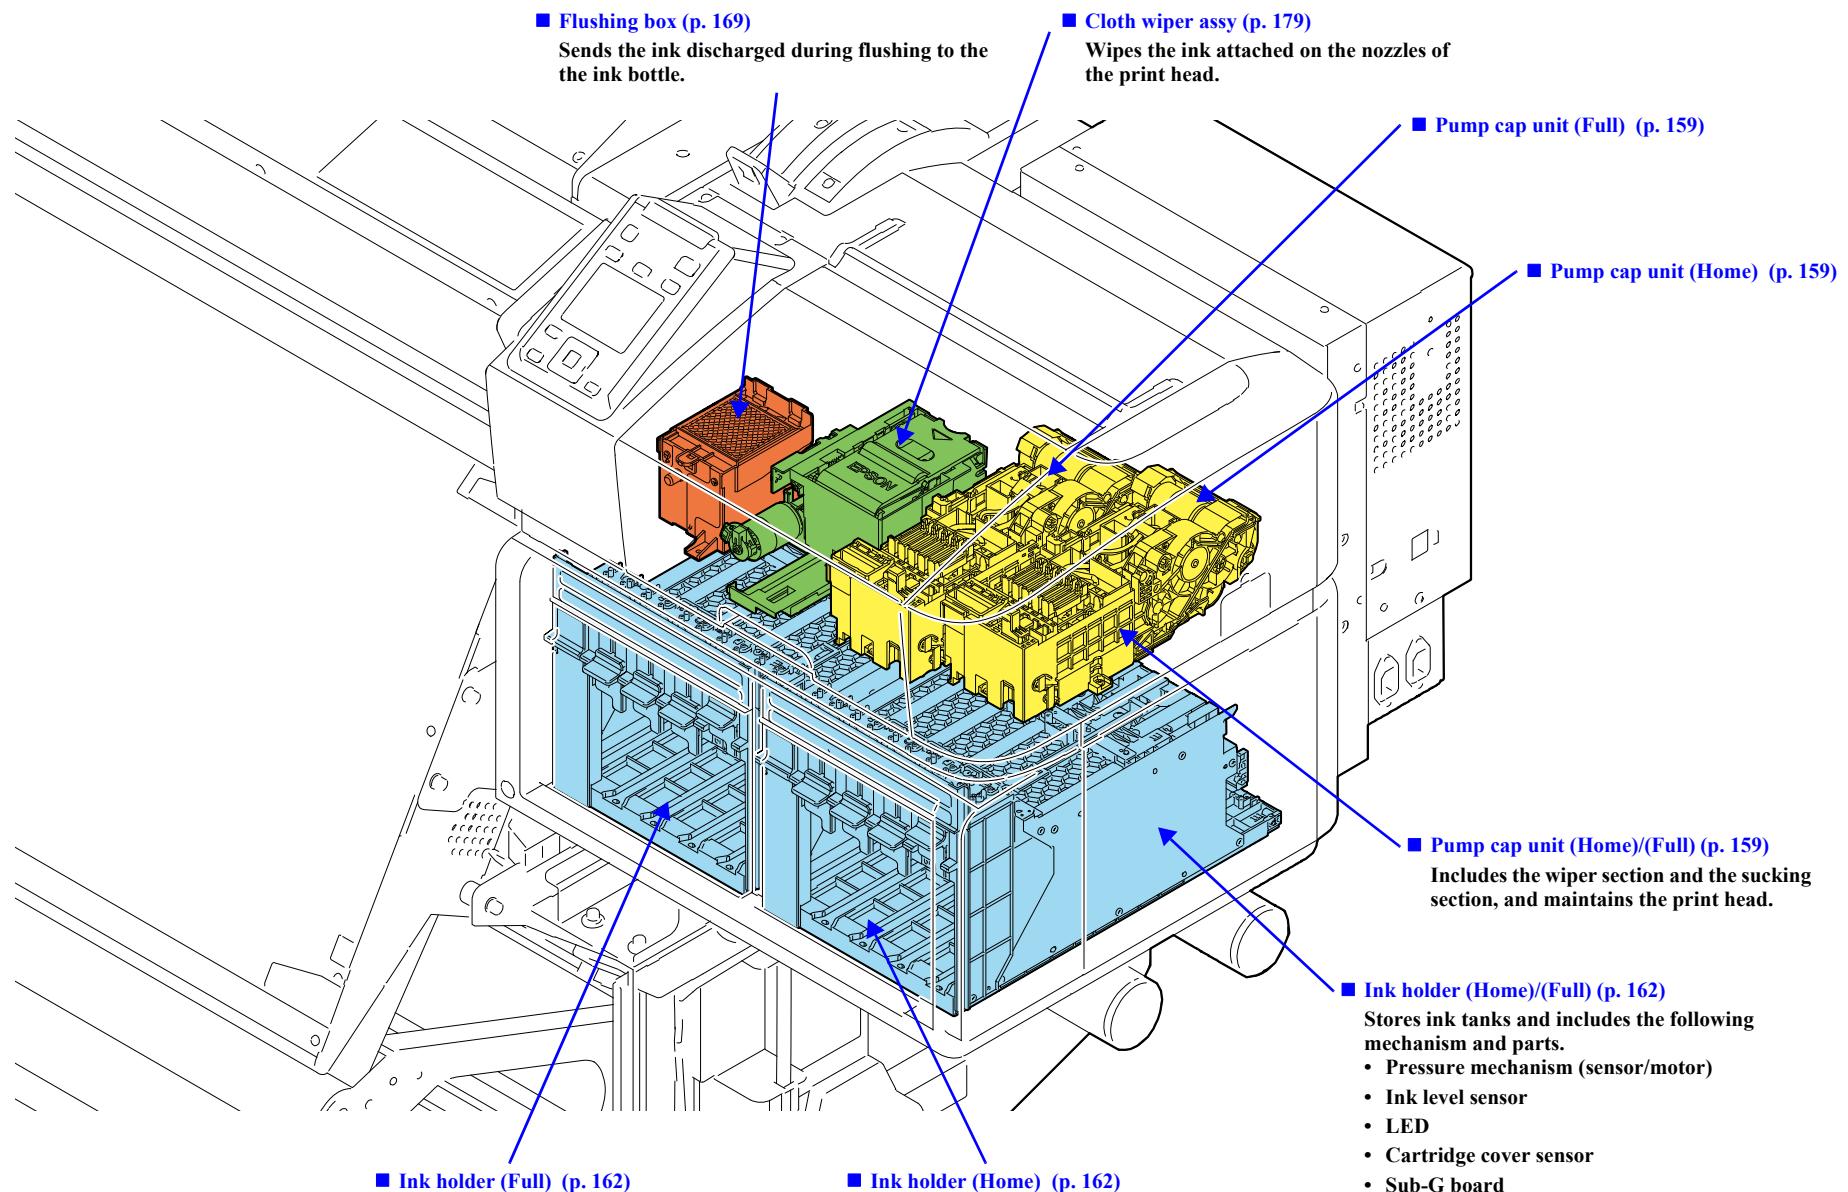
Carriage Mechanism/Ink System Mechanism
